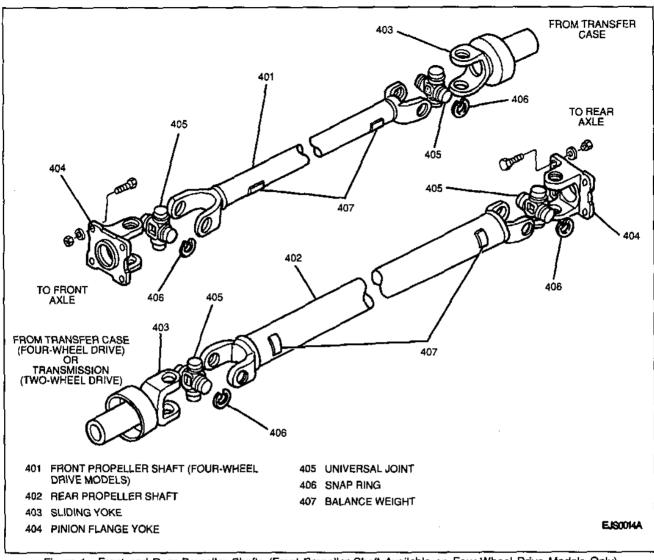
Front and Rear Propeller Shafts (Front Propeller Shaft Available on Four-Wheel Drive Models Only)
